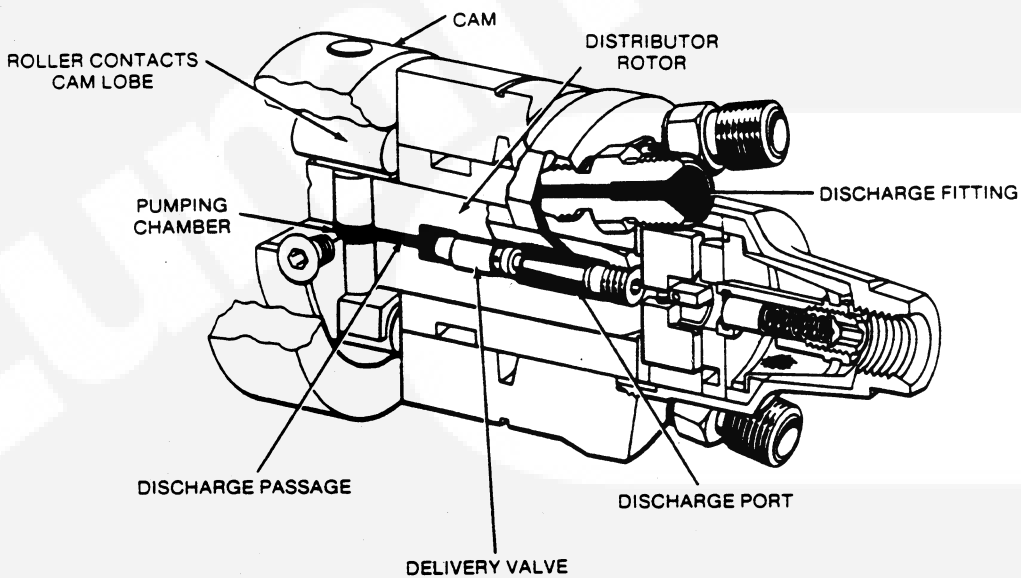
HYDRAULIC HEAD ASSEMBLY-CHARGING CYCLE
